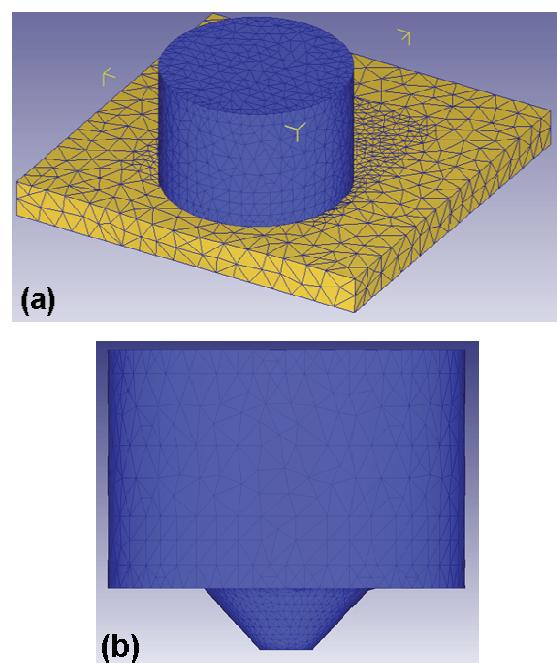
Model sketch during the sinking stage (a) and detail of the utilized tool (b)
